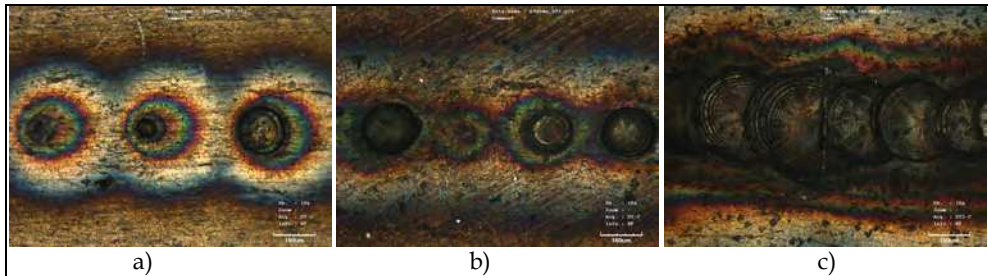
Weld bottom side in case of frequency a) 9 Hz, b) 13 Hz and c) 17 Hz.
